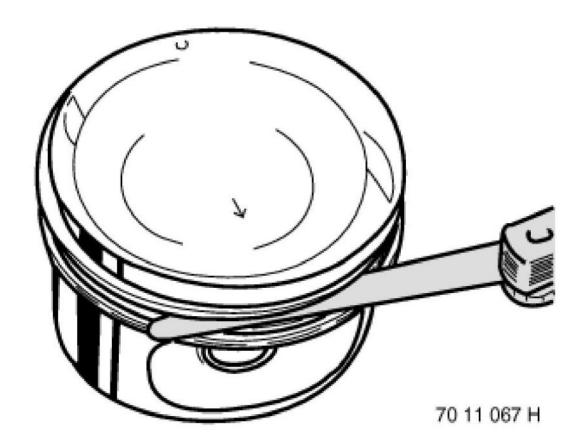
Measuring Axial Clearance Of Piston Rings In Piston Ring Groove Courtesy of BMW OF NORTH AMERICA, INC.
